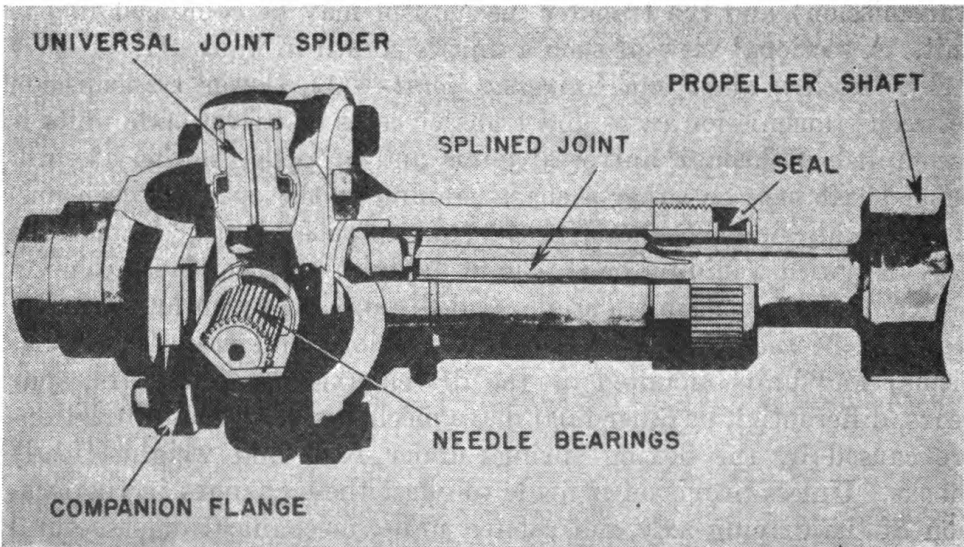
Universal joint at end of propeller shaft showing slip spline joint.
